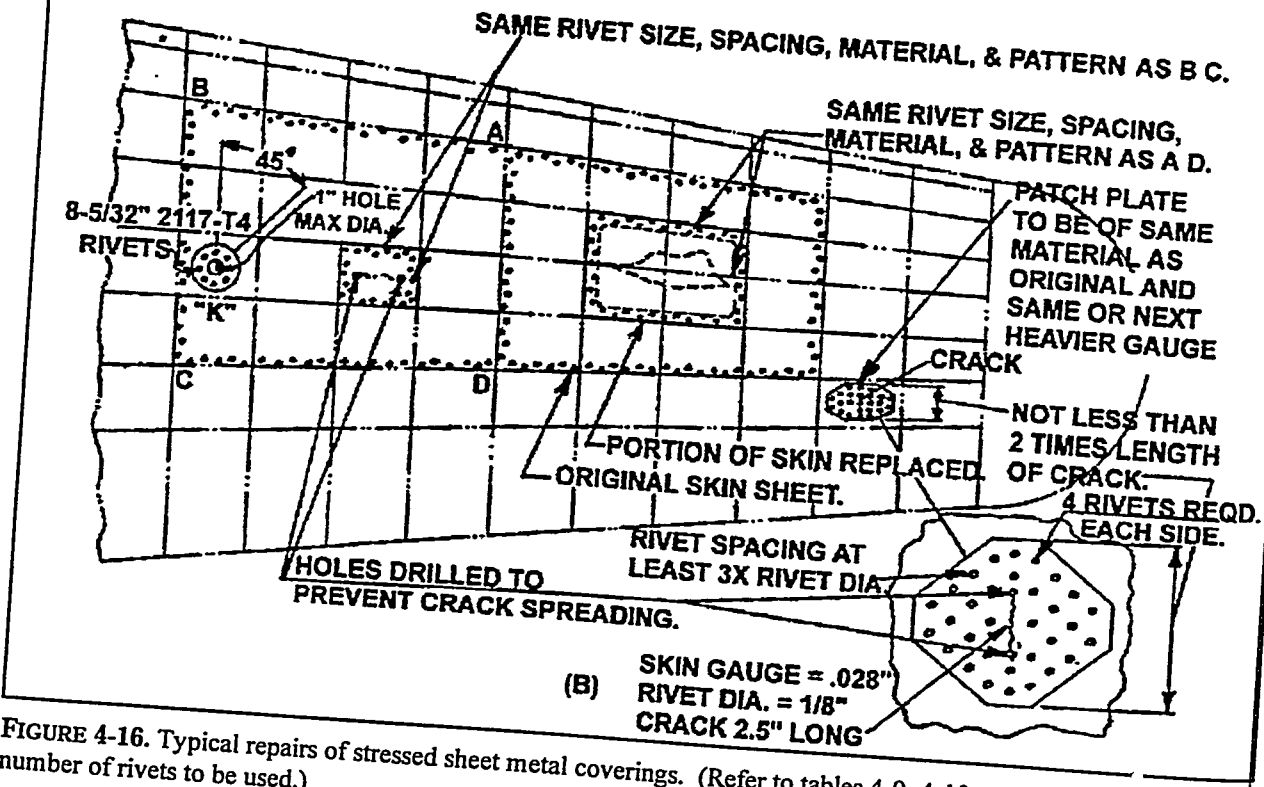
Typical repairs of stressed sheet metal coverings. (Refer to tables 4-9, 4-10, and 4-11 to calculate number of rivets to be used.)
